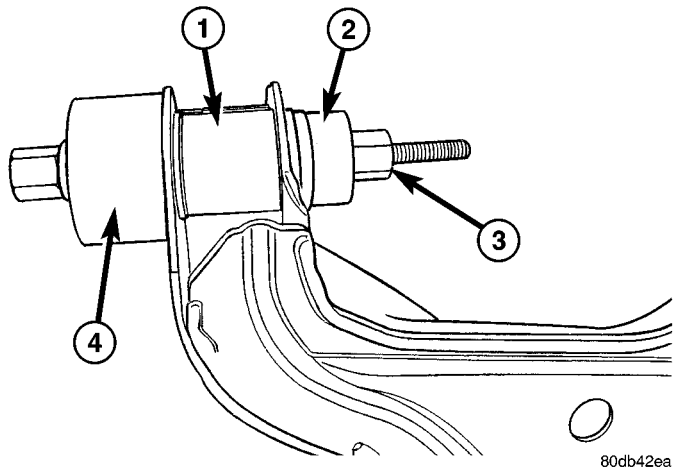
SMALL LOWER CONTROL ARM BUSHING - REMOVAL
